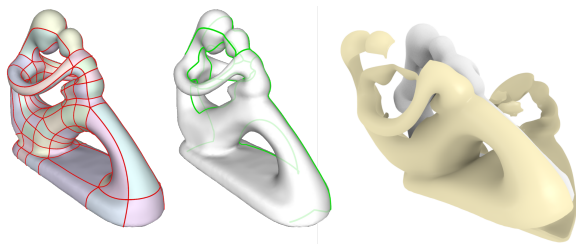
FlexMolds* [MPBC16] presents an automatic method for the generation of flexible molds defined as a thin layer of elastic material. The method automatically optimizes the cut layout required to open the mold and release the cast, based on a physically-based simulation of the extraction process.
